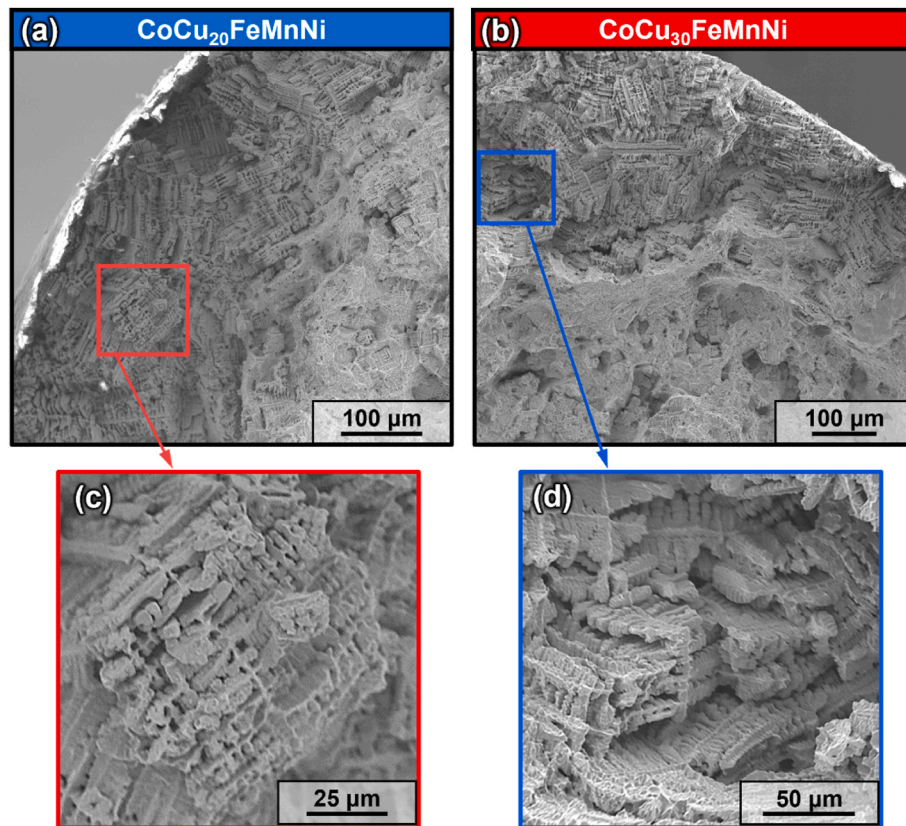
Fracture surfaces of welded specimens: (a) CoCu₂₀FeMnNi and (b) CoCu₃₀FeMnNi welded joints and corresponding detailed views in (c) and (d), respectively.
